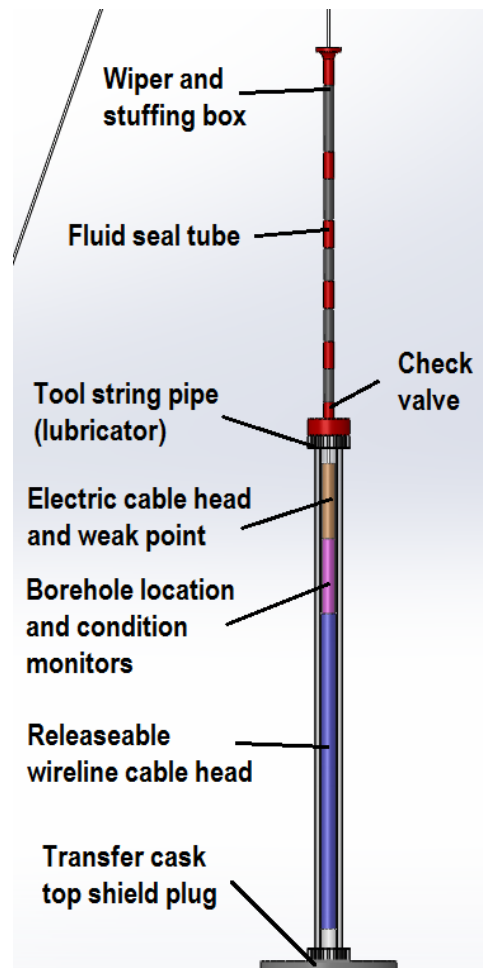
Tool string and wireline attached to top of transfer cask.
